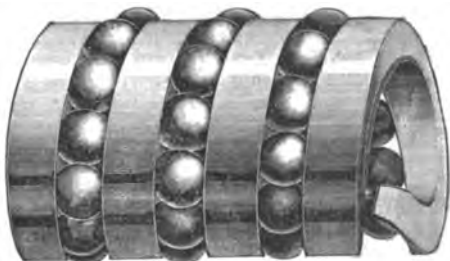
HOWARD MULTIPLE BALL BEARING.
